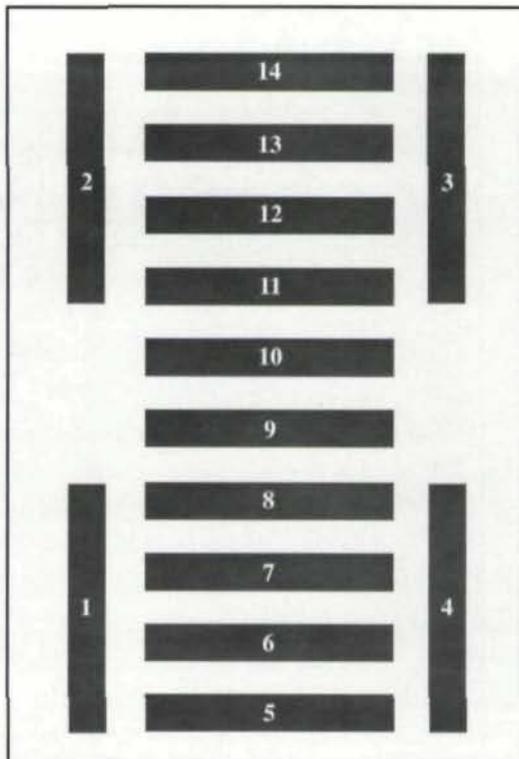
Arrangement of 20" spur gears in carburizing furnace.
